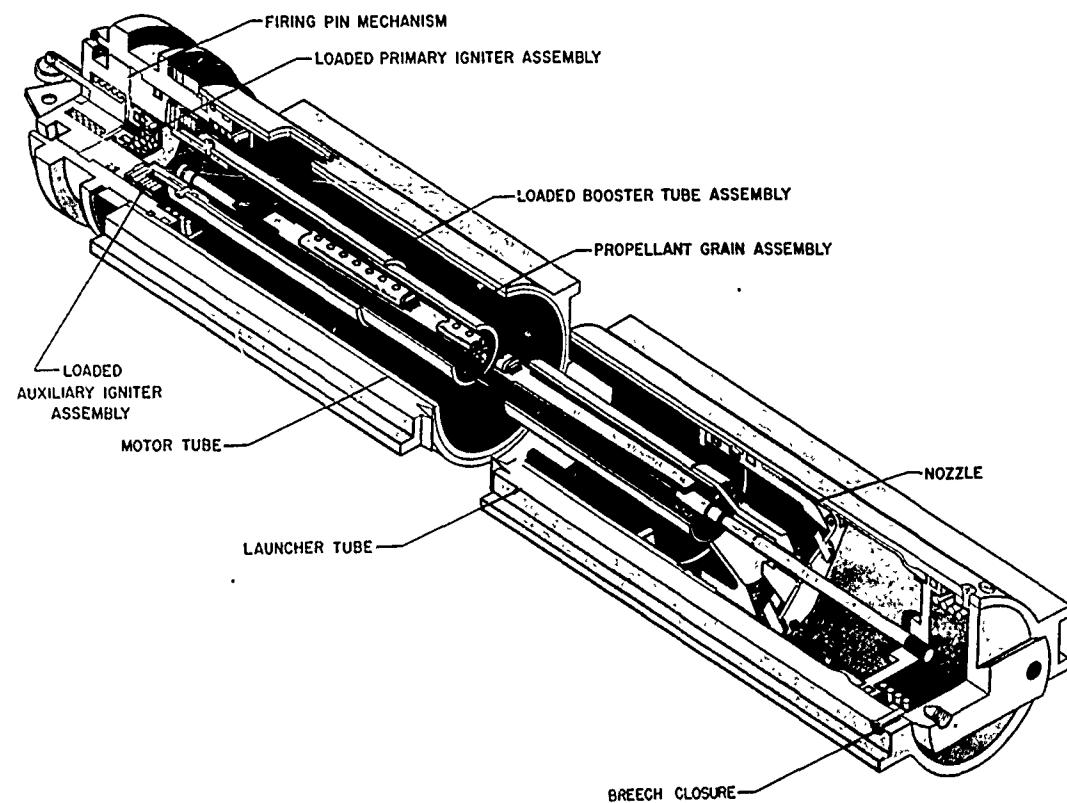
Cutaway View of Rocket Catapult Mk 2 Mod 0.
